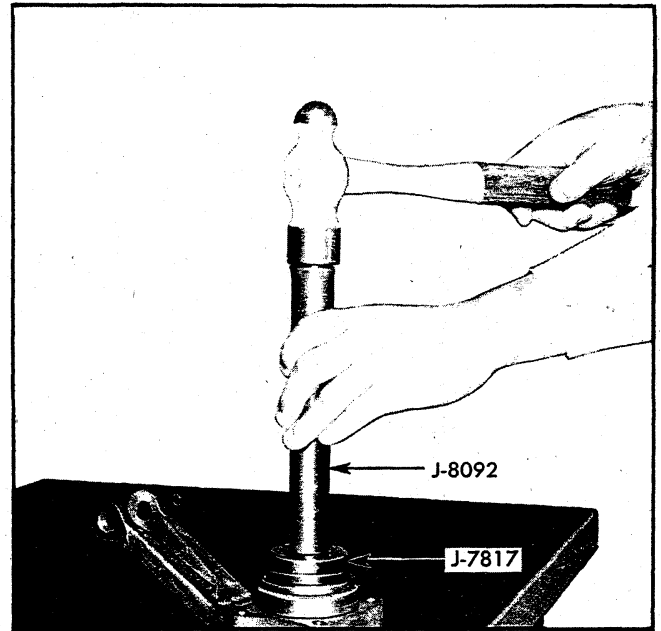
Installing Spindle Bearing Cup (Corvette)
